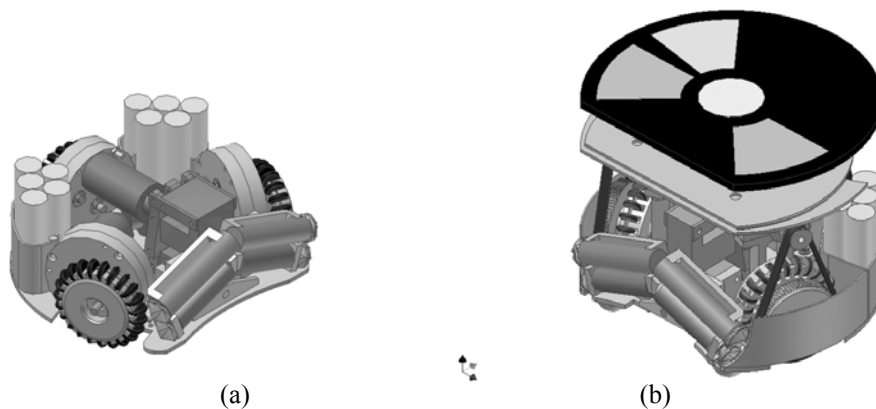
Our robot: (a) with gearbox. (b) Small size robot with Timing belt
